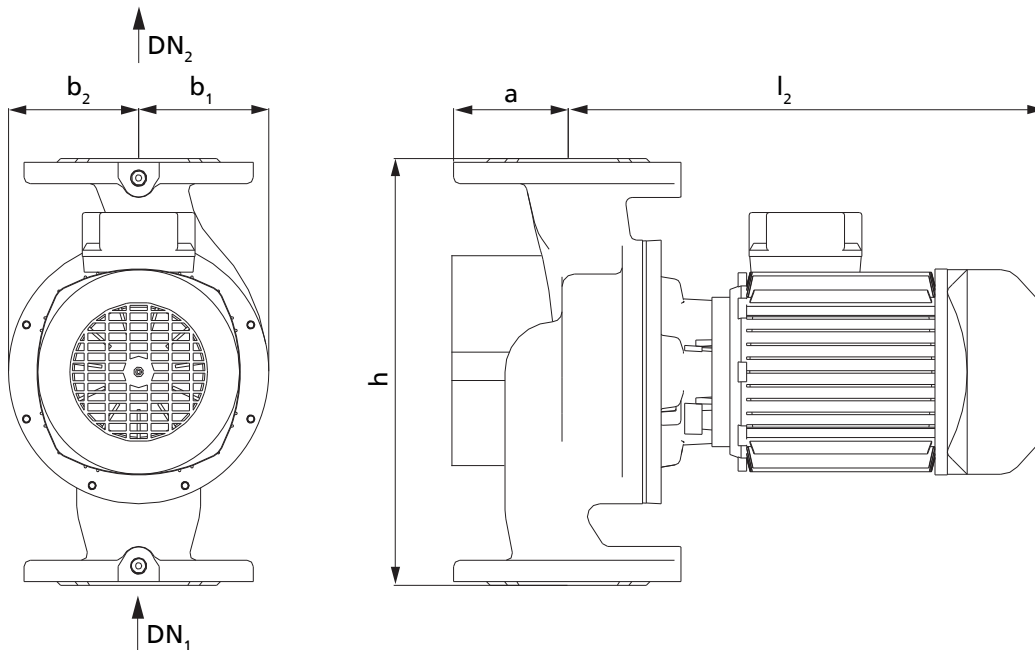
Dimensions of flanged pump set, size ≥ 032-032-100
